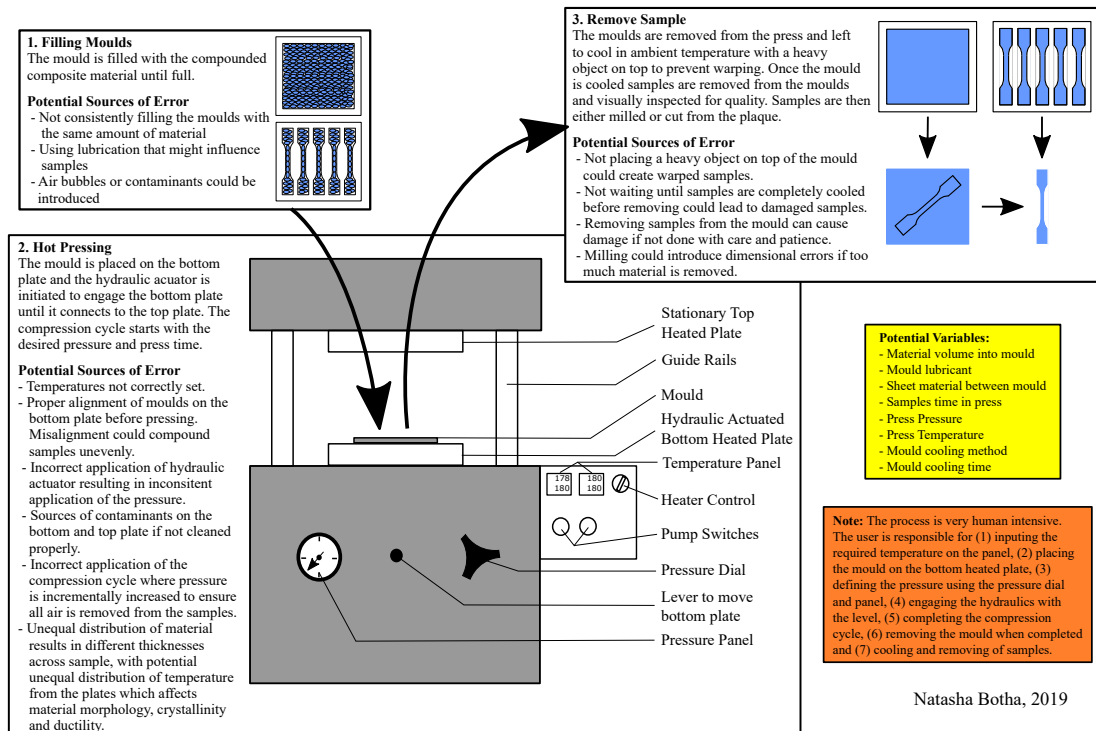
Graphical representation of the compression moulding process including all the potential sources of error. Two mould types are considered: a plaque from which the dogbone sample is milled and a mould with five individual dogbone samples.
